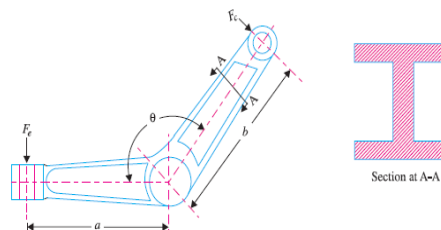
44 Rocker Arm for Exhaust Valve [37]
